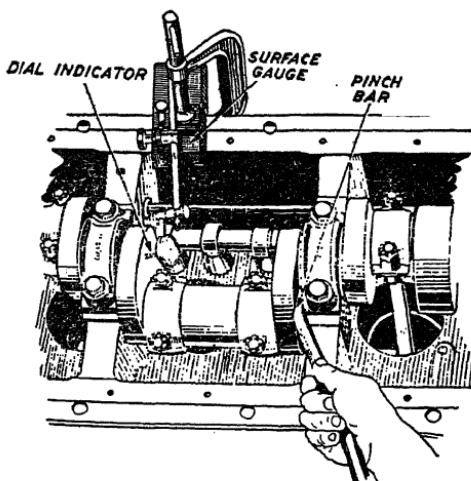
A Dial Indicator Is Clamped to the Crank Case to Register End Play When Shaft Is Moved with Pinch Bar
